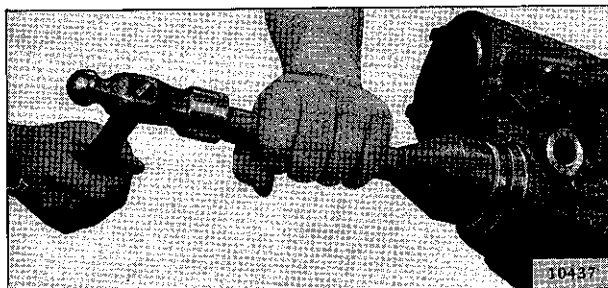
OUTPUT SHAFT OIL SEAL DRIVER
